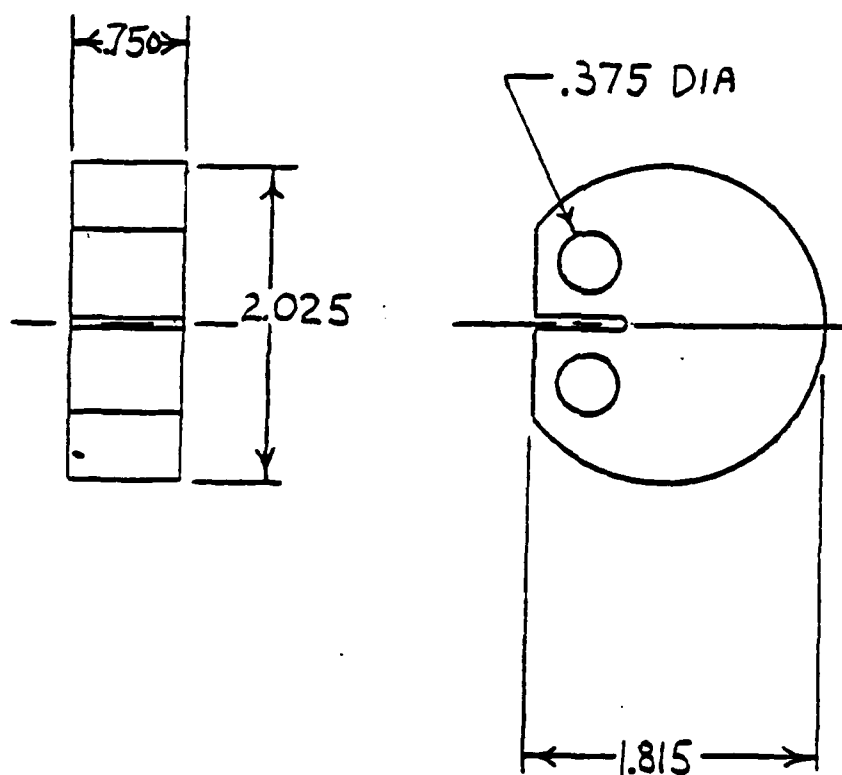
K_b COMPACT TENSION TEST SPECIMEN USED FOR FRACTURE TOUGHNESS TESTING.
